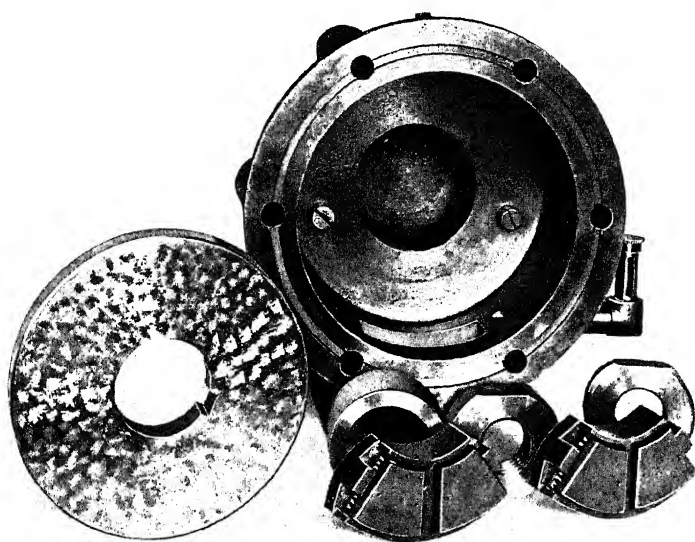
THRUST BEARING FOR HORIZONTAL SHAFTS
